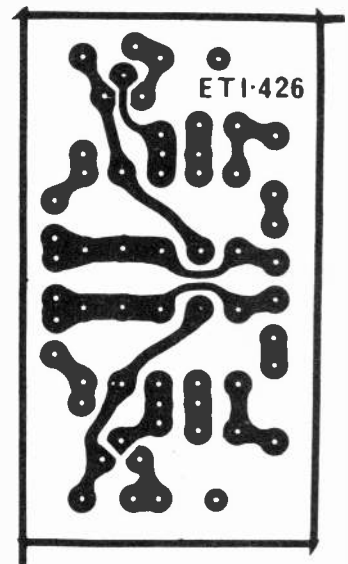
Printed circuit board layout for the rumble filter 40mm x 70mm.
